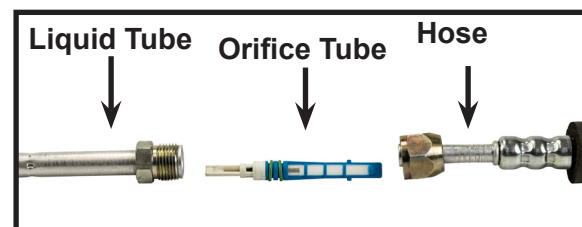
Attach Liquid Line Hose Assembly to Liquid Line Tube
